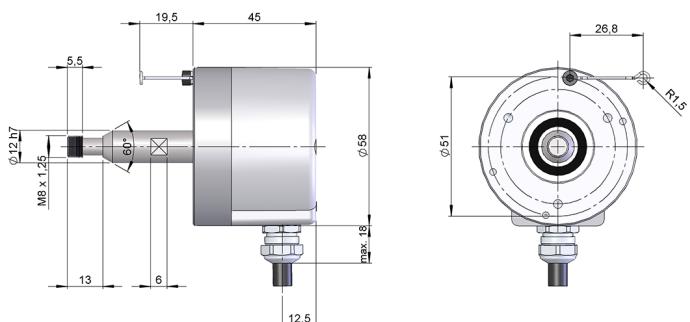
Drawing shaft type 1, anti-rotation system type 4, connection type 2
